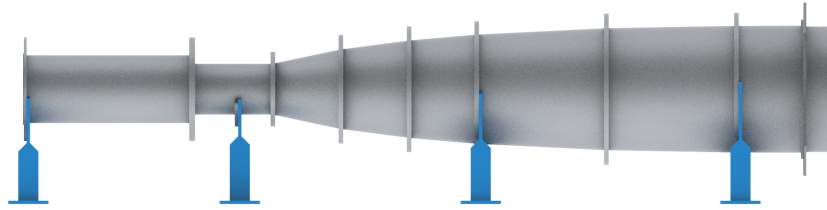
Full assembly of the Mach 8 axisymmetric nozzle.
